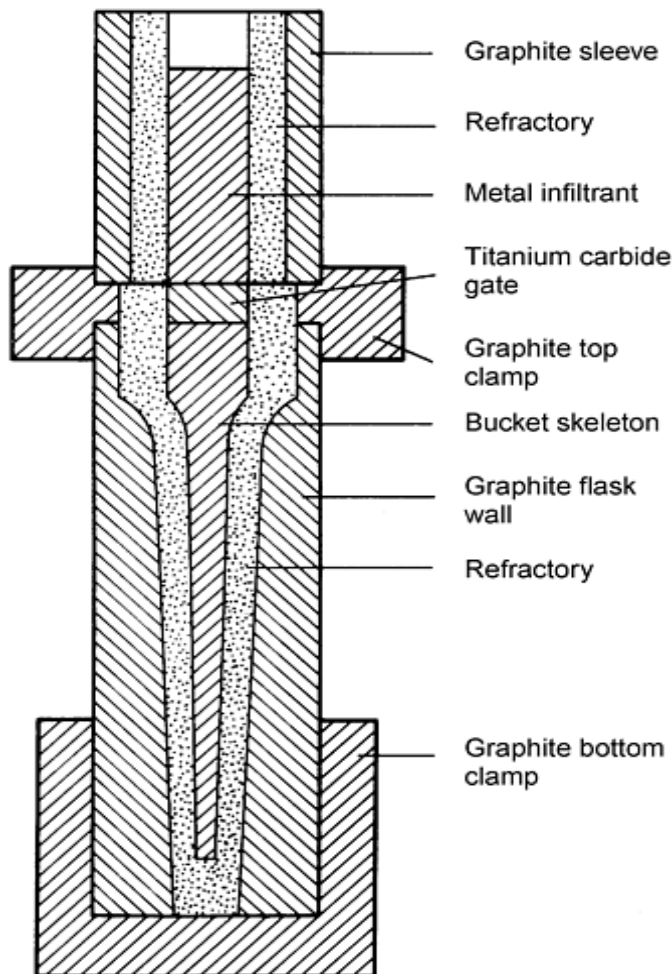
Cermet turbine blade infiltration mold assembly. Source: Ref 13
